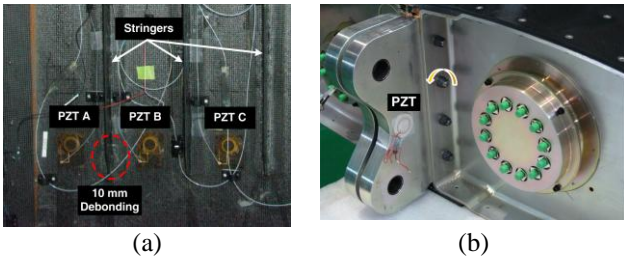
PZT installations and introduced actual damages: (a) Three identical PZTs were placed among stringers on the inner surface of upper skin. 10 mm-debonding was introduced between the upper skin and a stringer. (b) A PZT was placed at a fitting lug. The marked bolt was loosened by 360° turn.
